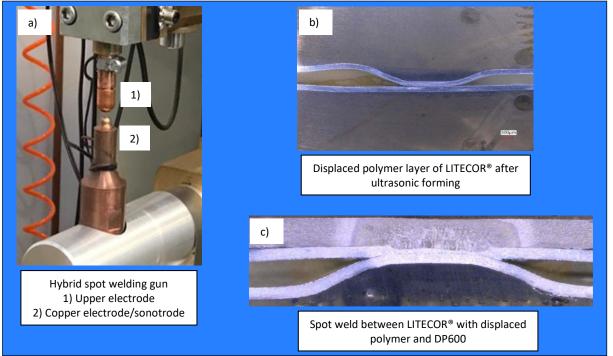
a) Hybrid spot weld gun, b) Ultrasonic forming process of LITECOR®, c) Spot weld between LITECOR® and DP600
